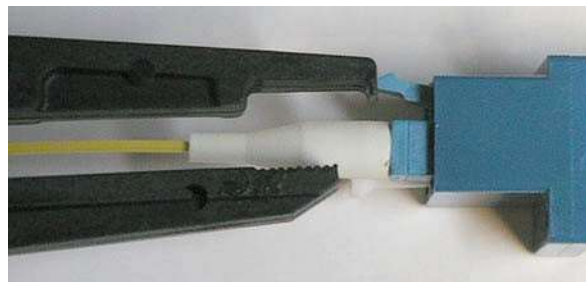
Proper Grip Applied to Single-Piece Latch
